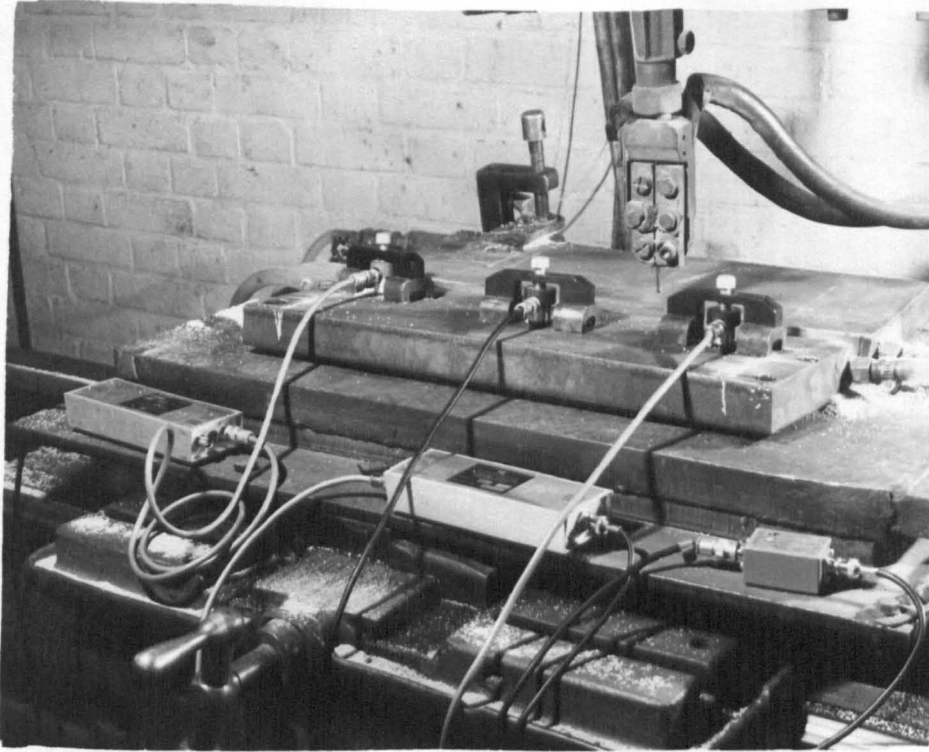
Test plates with acoustic emission transducers to detect the occurrence of cracks in the deposited weld metal.
